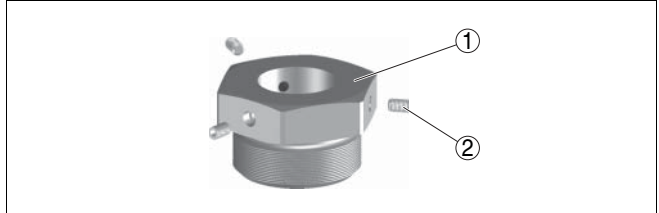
Lock fitting ARV-LS8112.1 - unpressurised
